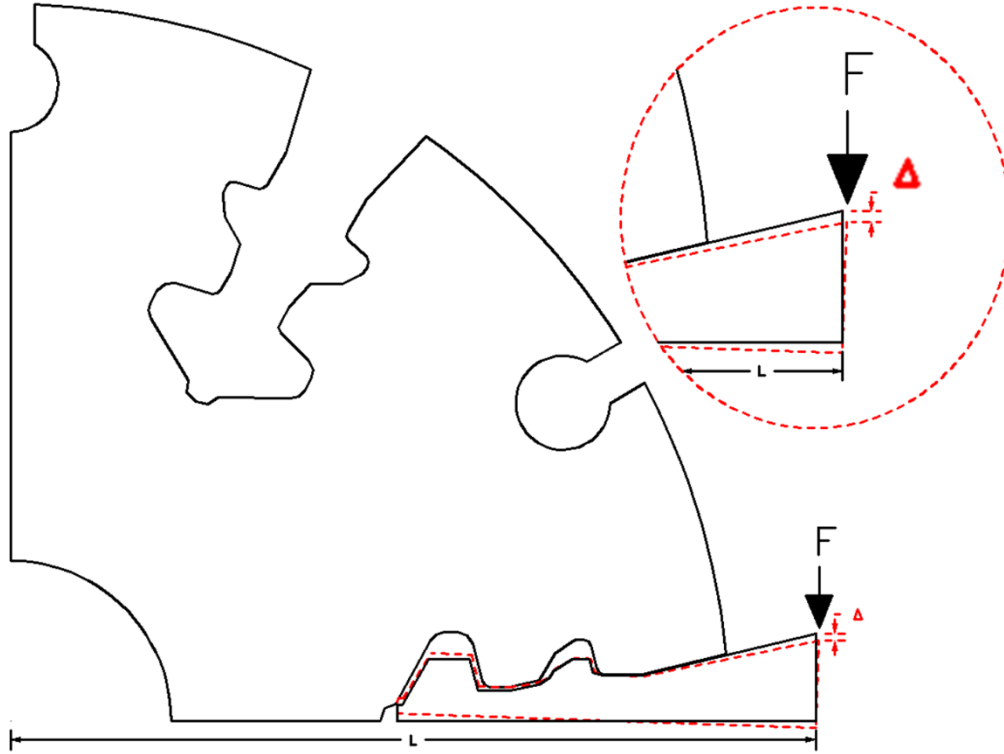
Geometrica® 6Sd-00 Jointing System In-Plane Bending Semi-Rigid Configuration
